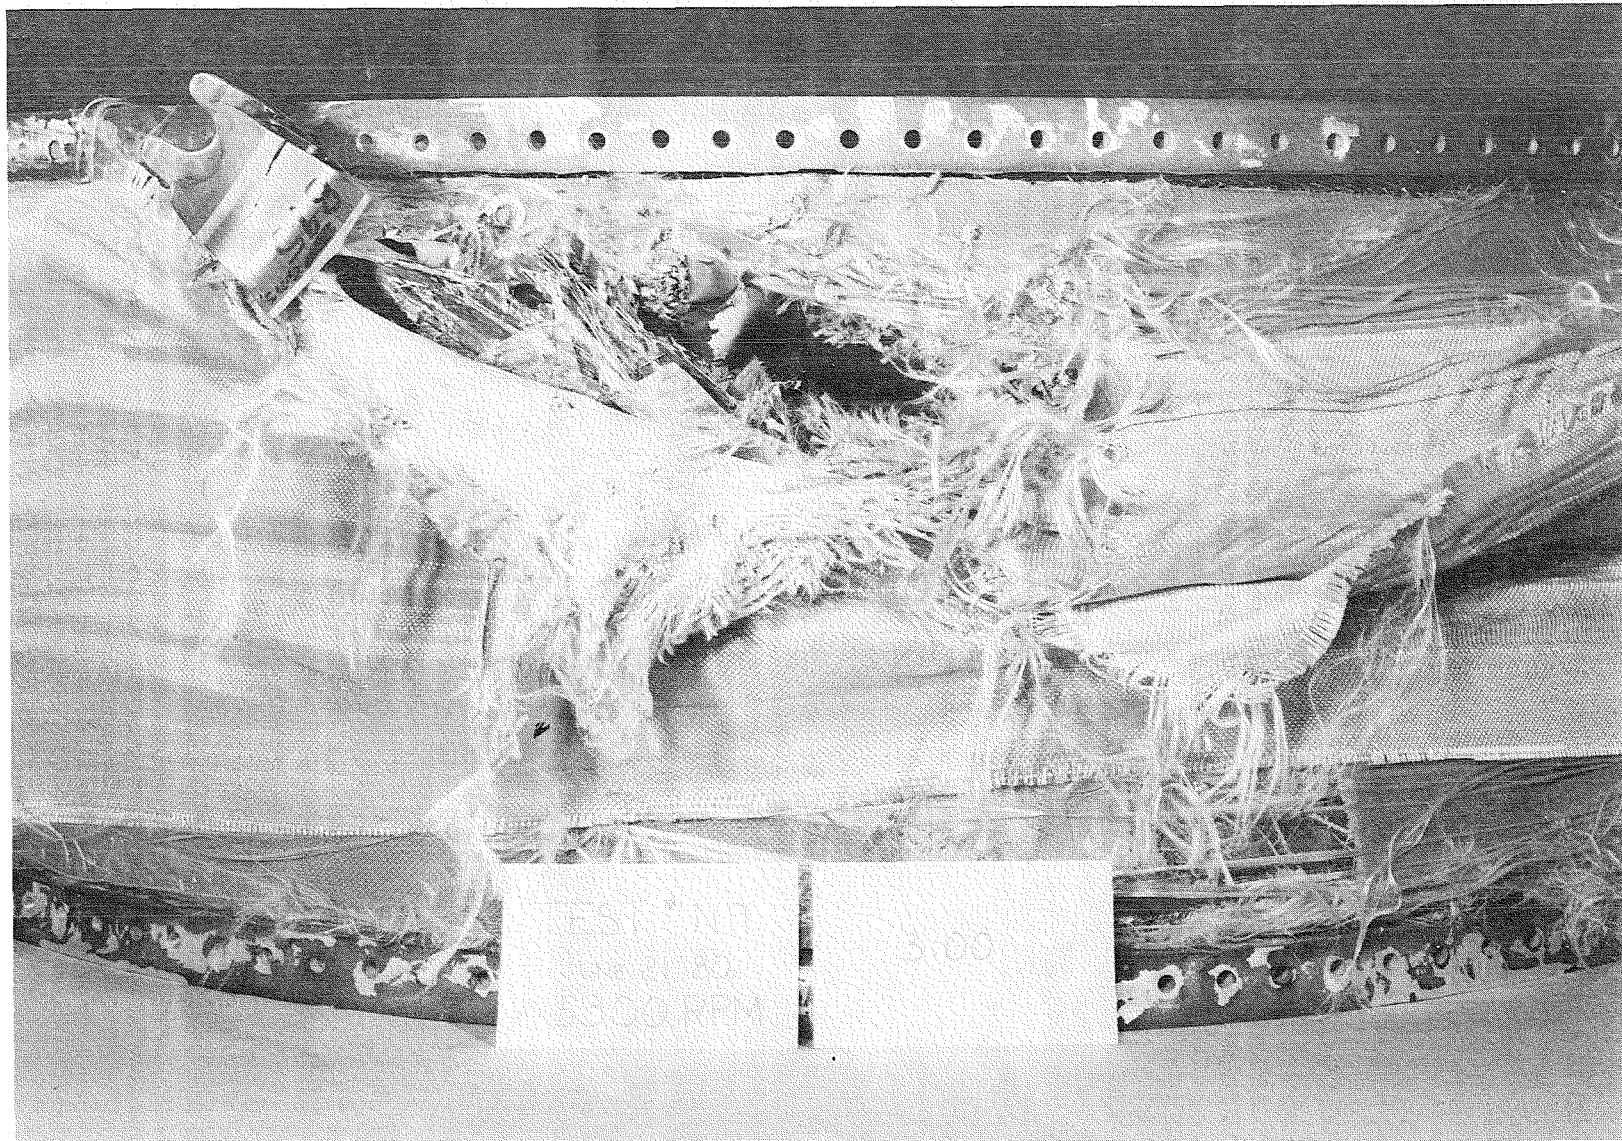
Exterior View - Test 9 - Six-Ply Side - Aluminum Cover Removed.
